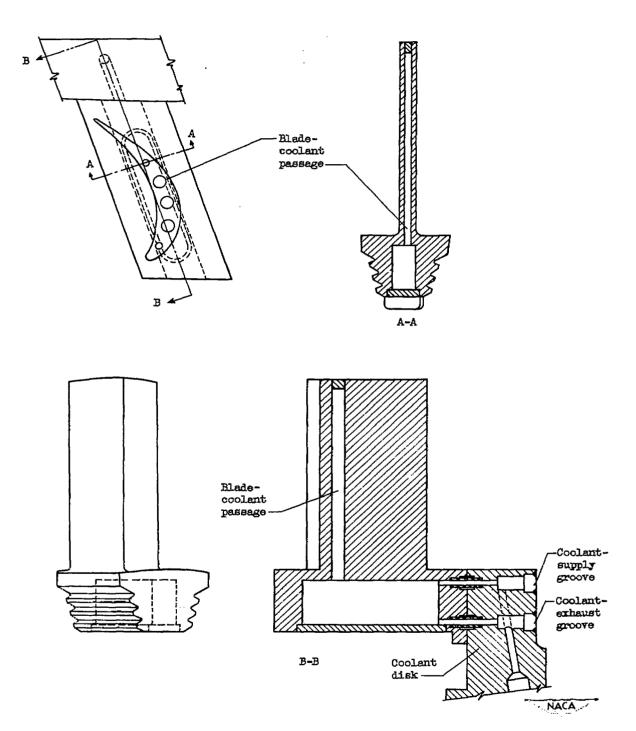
Method of blade attachment in liquid-cooled steel turbine.
